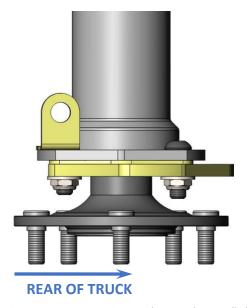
TOP VIEW Primary Caliper Bracket Installed (DB1572BR LH Side Shown)
